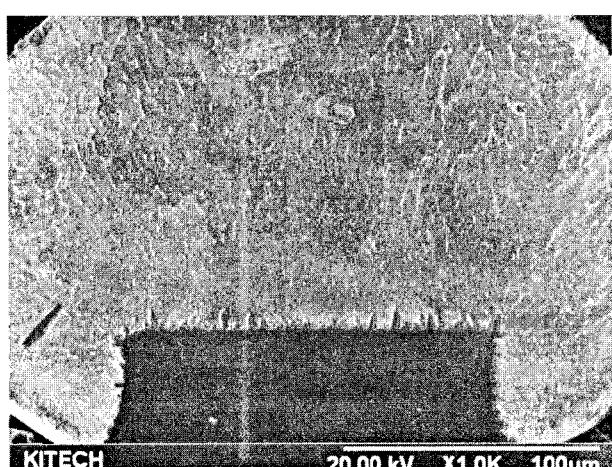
SEM images of the board-side solder joint fabricated by using Sn-0.3Ag-0.7Cu solder paste.
